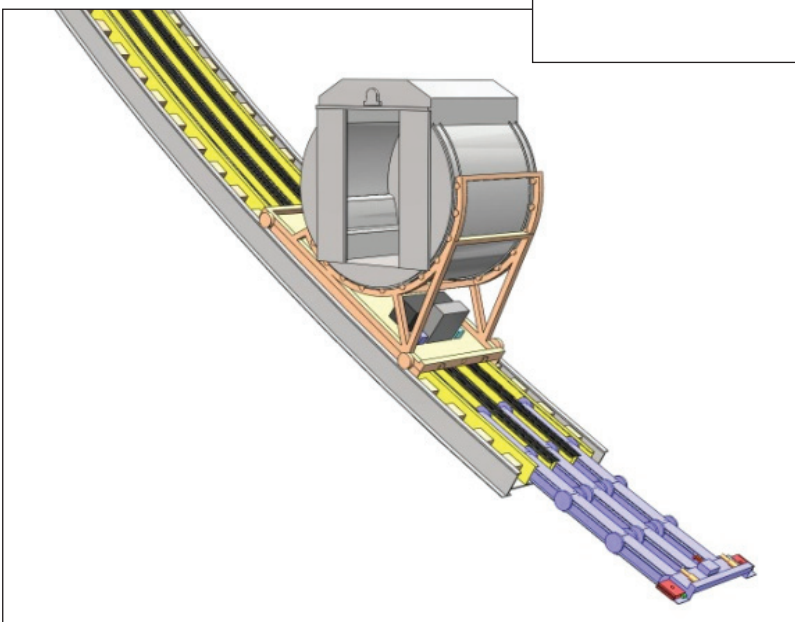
shows the passenger carrying assembly as a lightweight structure of approximately 3m diameter which can detach from the main drive assembly and can rotate in the form of a drum (grey). The whole cabin has a low centre of gravity. The retarders, which engage the twin magnet tracks under the main cabin assembly, negate passenger entrapment by returning the car at low speed to the nearest floor under gravity. An over-speed governor is mounted on board together with wireless data, batteries and a super capacitor pack.
